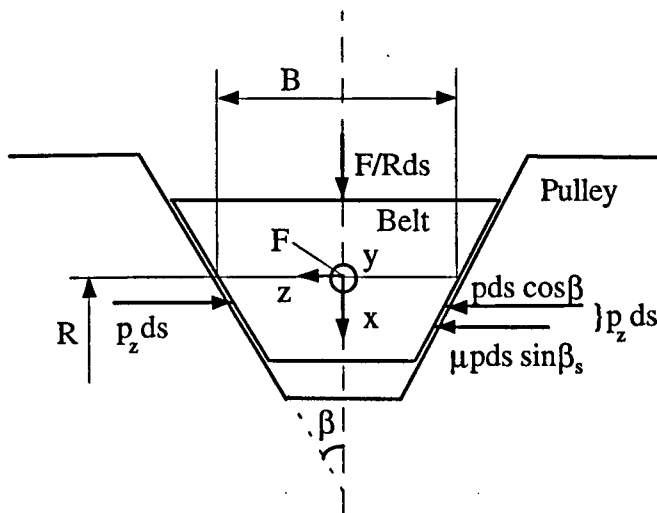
Perpendicular forces acting on a belt cross-section [3]
